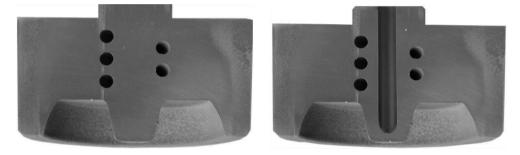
Laser-sintered prototypes of the forging die with integrated cooling channels; Model A (left) and Model B (right)
